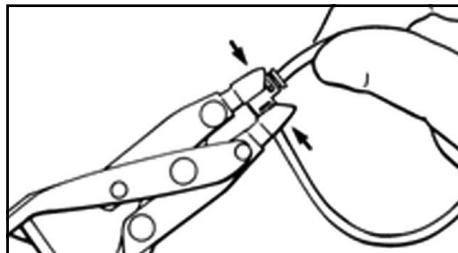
Use the tool twice when using a right angle connector – once on each connector end
